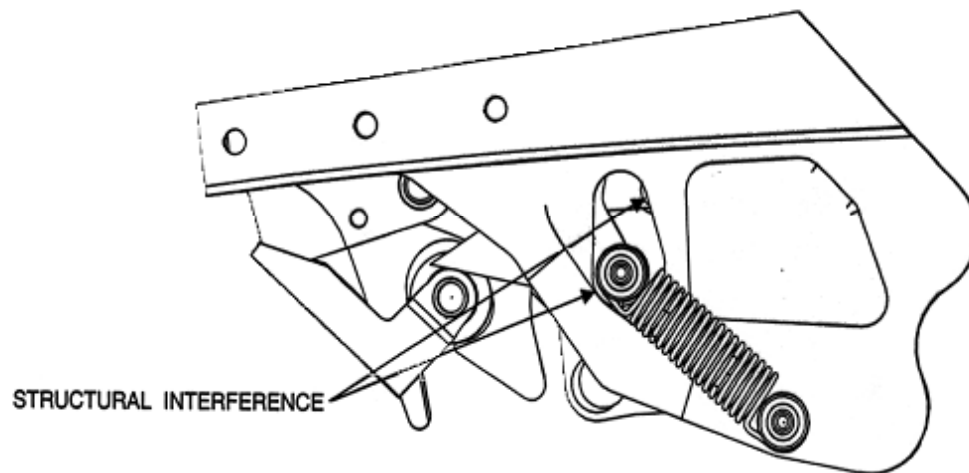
MAIN LANDING GEAR UPLOCK LATCH MECHANICAL INTERFERENCE
